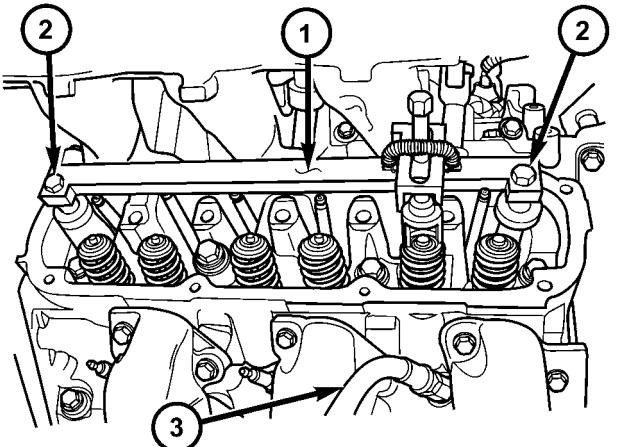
VALVE SPRING - REMOVE/INSTALL (HEAD ON)
